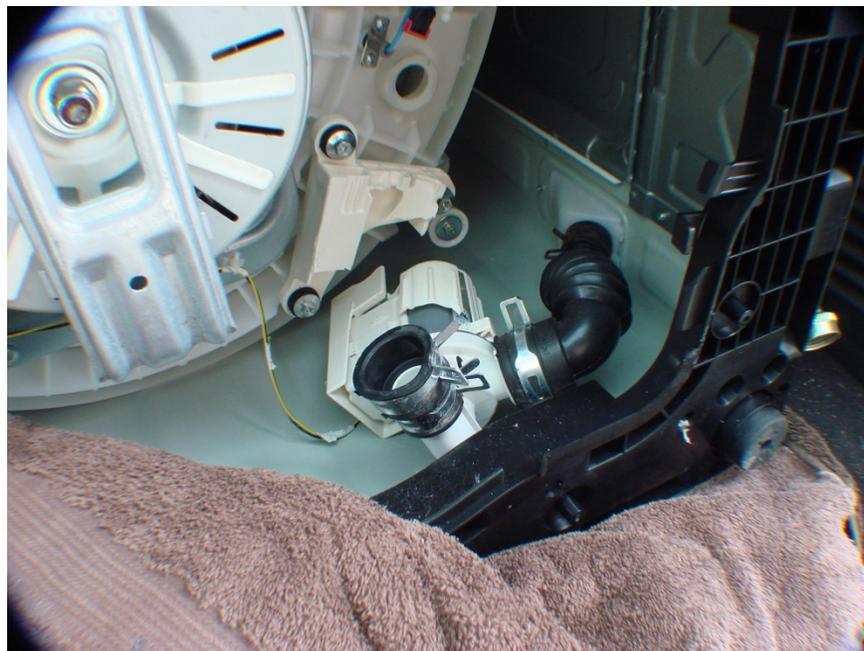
This is a fractured pump bracket. The manufacturer attached the pump assembly to the tub, which vibrates in use. I have seen 4 cases of this same failure. The fix was to move the pump assembly to be supported on the frame of the machine. At failure, the pump assembly pulled the large hose connection off of the tub. The open nozzle is above at the top center of the photo.
